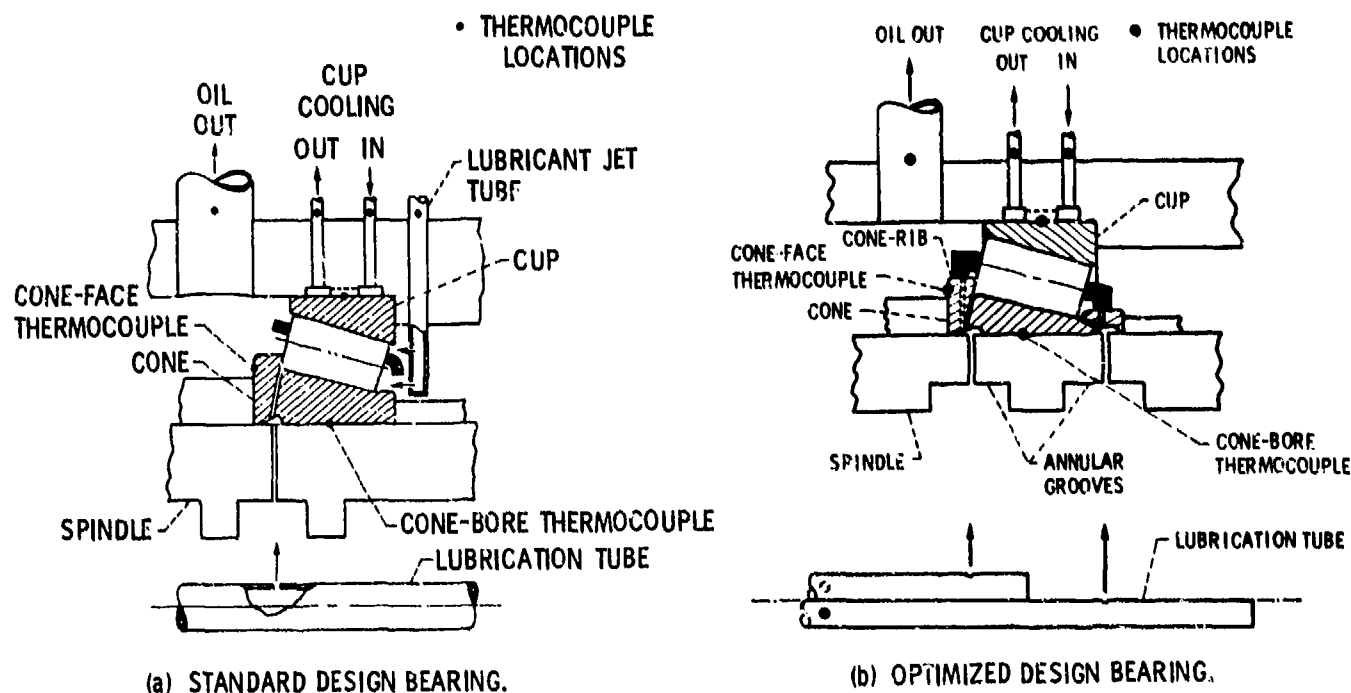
Test bearing lubrication, cooling, and thermocouple locations.
